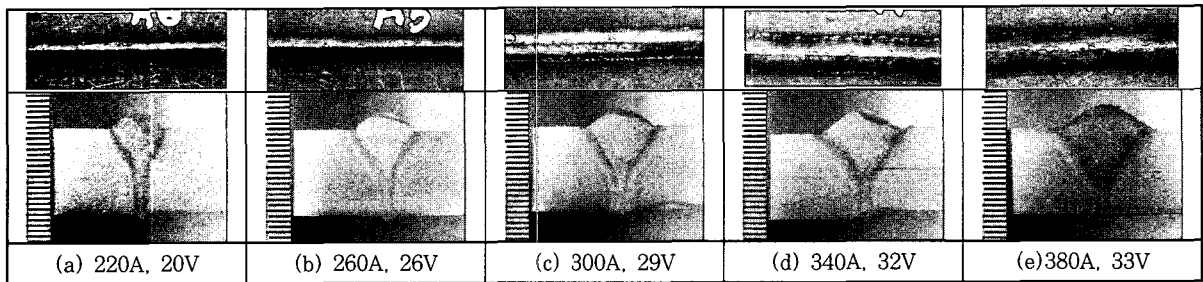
Top and cross sectional views of hybrid welds on butt joint with no gap
